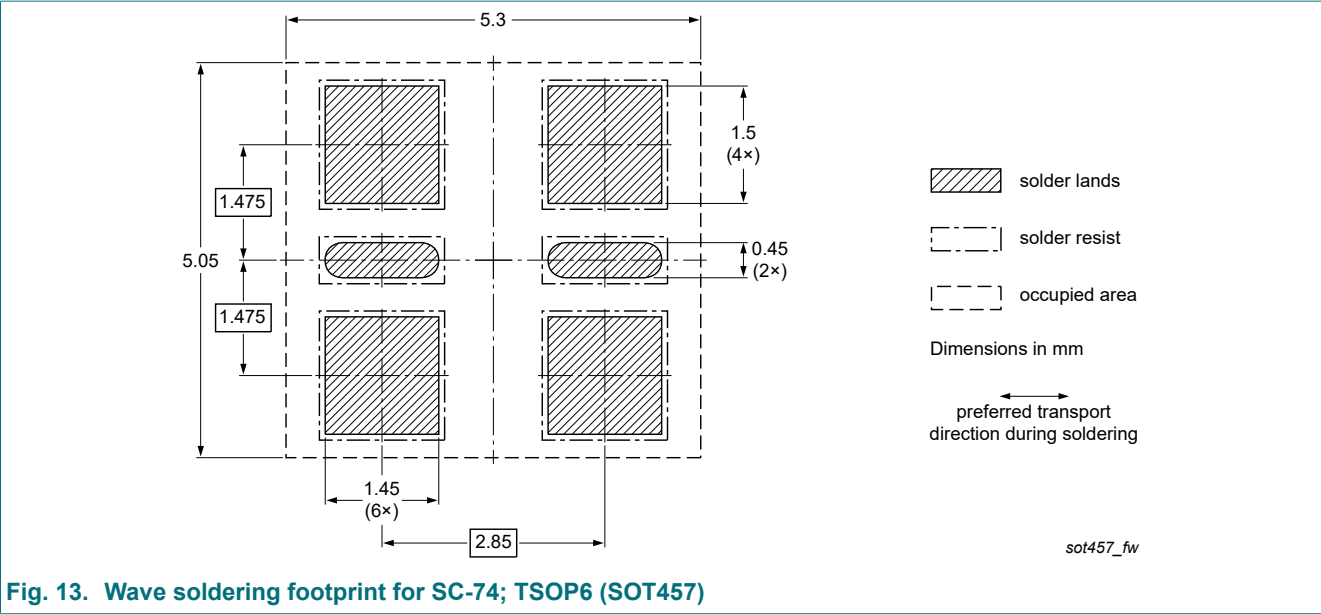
Wave soldering footprint for SC-74; TSOP6 (SOT457)
